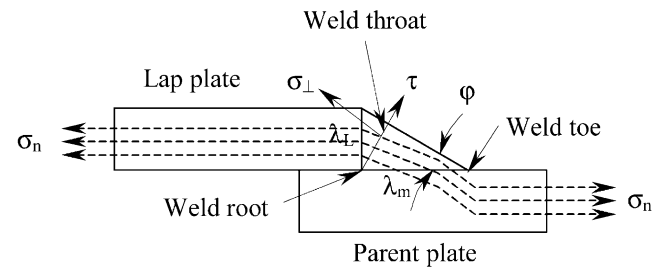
Weld leg length and stress components in weld throat surface.
